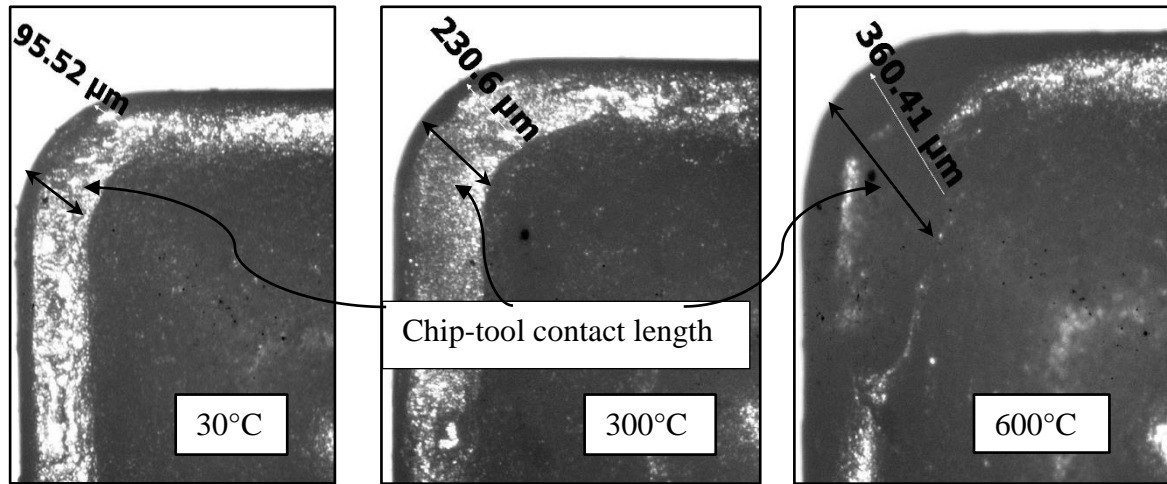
Optical view of chip-tool contact length at room and heated conditions at cutting speed of 100 m/min, feed 0.13 mm/rev and depth of cut 0.5 mm
